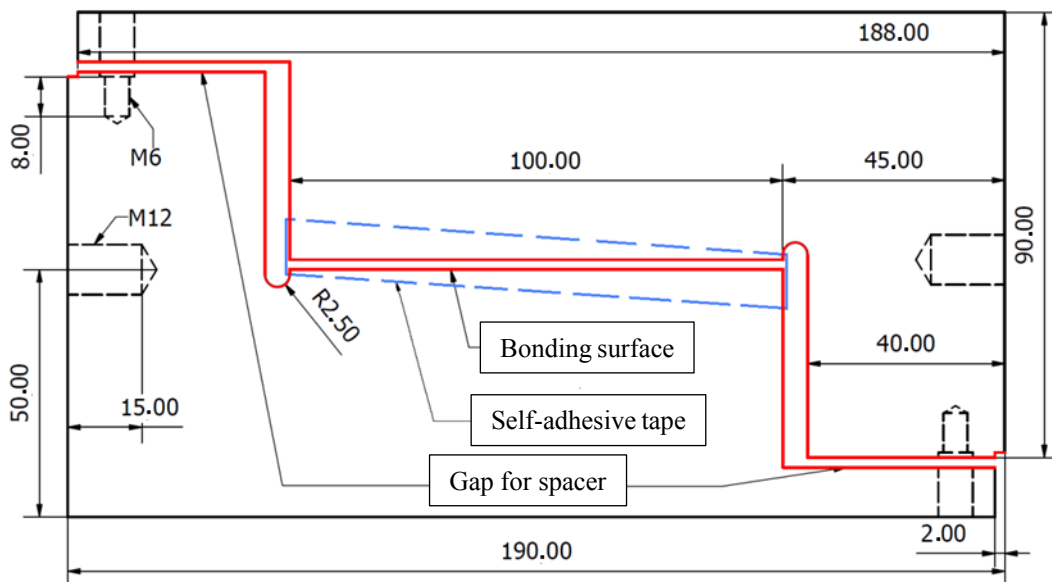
Geometry of the PU-AlMg3 shear specimens (dimensions in mm) [1]
